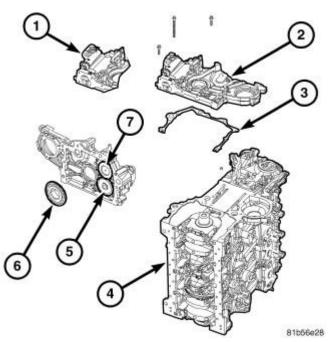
Vacuum Pump And Oil Pump Courtesy of CHRYSLER LLC
